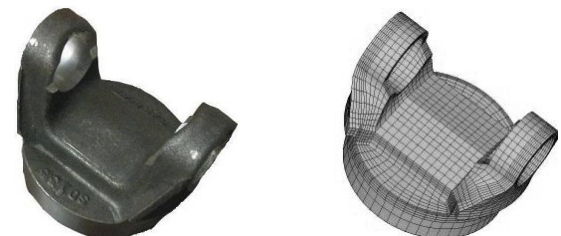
Weld Yoke Part & ANSYS Model (40,000 nodes)
